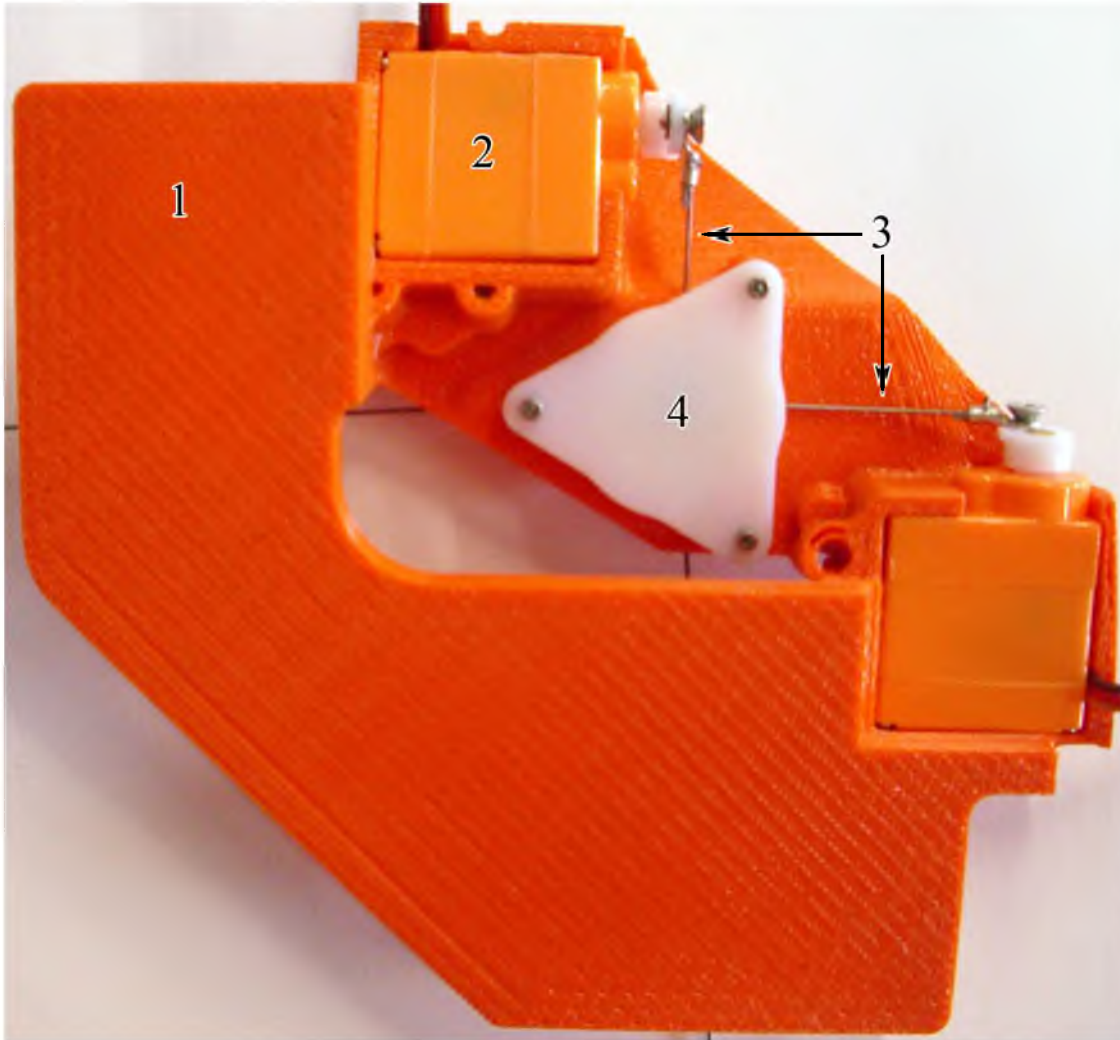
Labeled photo of actuator assembly. (1) Mounting plate (2) Servo (3) Spring steel wires (4) Support plate that supports the sliding plate
